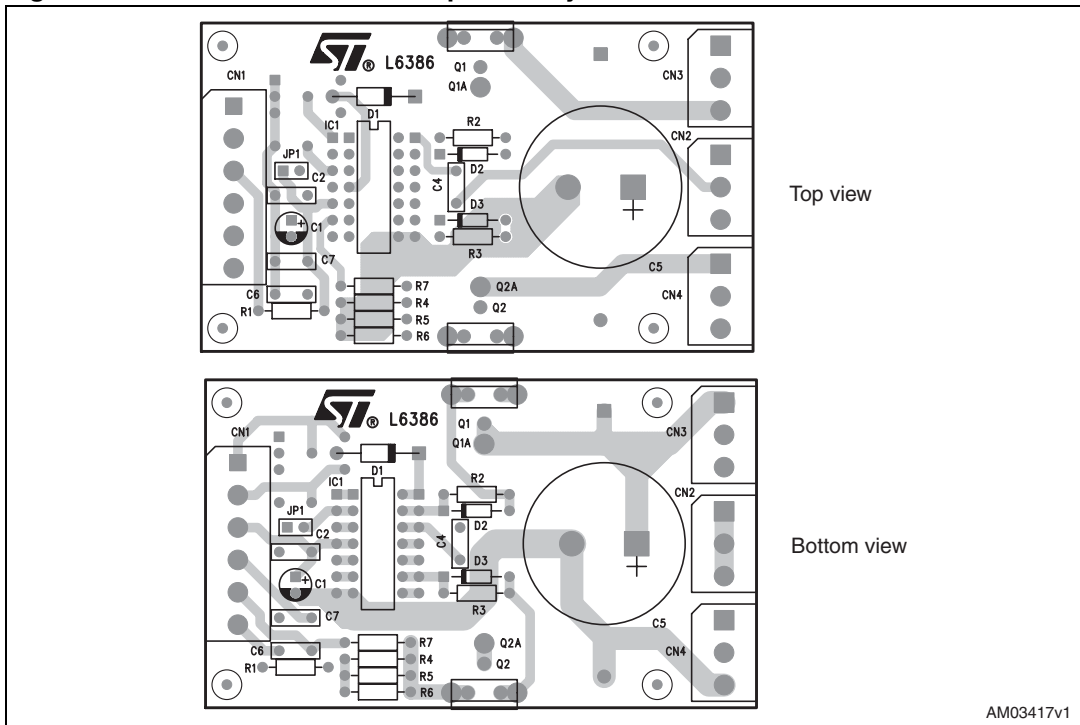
L6386E - PCB and component layout of the evaluation circuit
